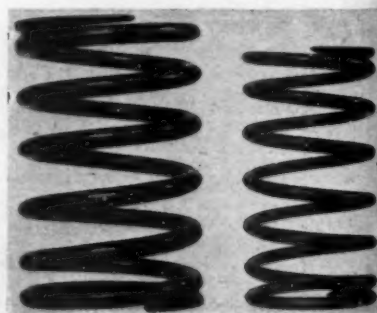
Inlet valve springs of Jumo 211 J.1.
